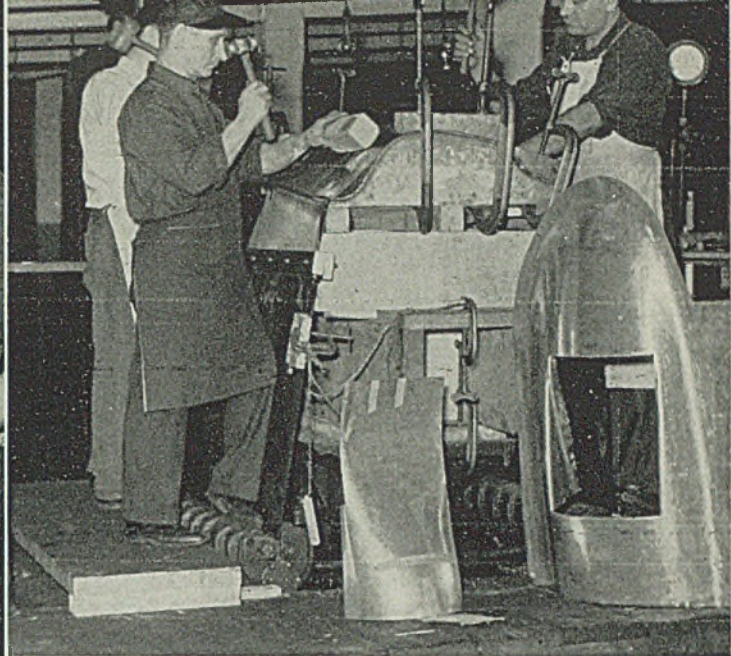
One of many zinc alloy dies (Kirk-site) now being used successfully for deep drawing aircraft parts in double-acting crank presses is shown here. Both die and punch as well as pressure ring are cast close to finished dimensions
